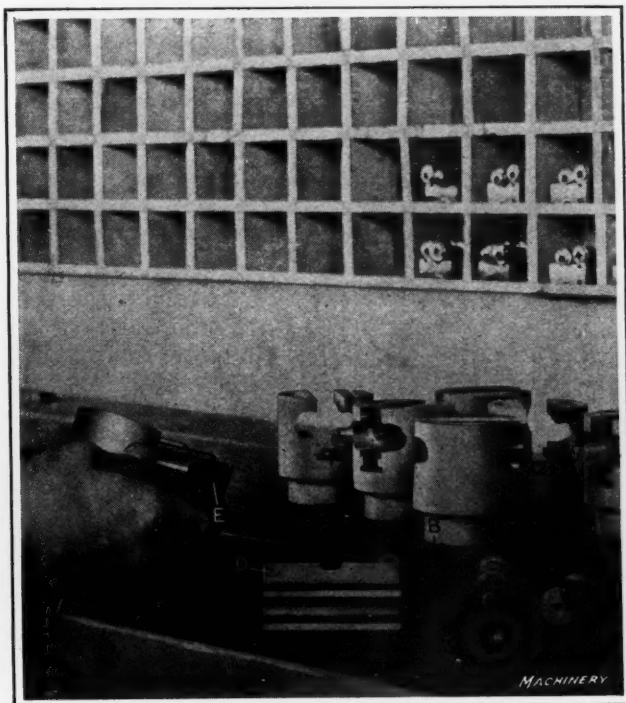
Gaging the Operating Screw Recesses with Reference to the Side of the Jaw Gash
